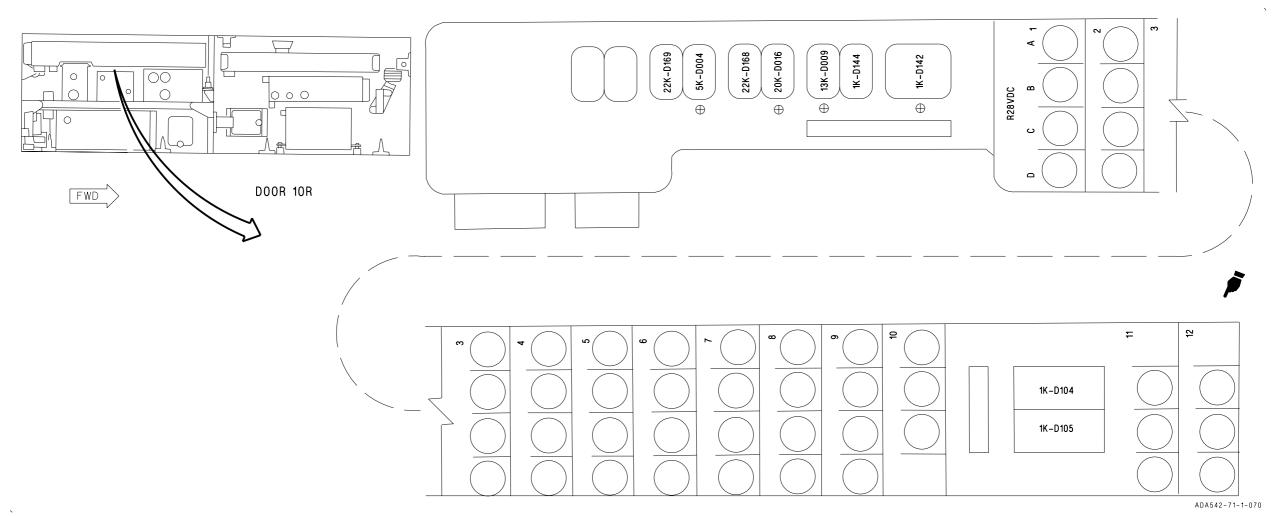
No. 4 Circuit Breaker Panel Assembly - 52A-D026-161360 AND UP (Sheet 1)
